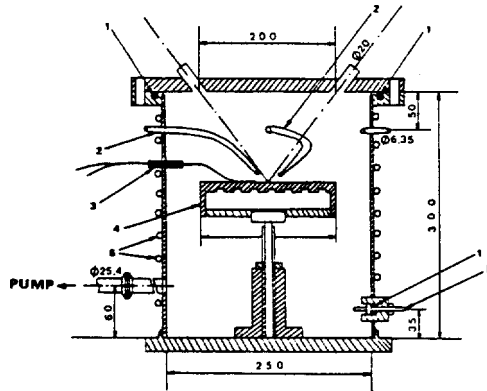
Detail diagram of reactor and heater. (1; O-ring, 2; inlet gas tube, 3; thermocouple, 4; heater, 5; electrode, 6; cooling water line).
